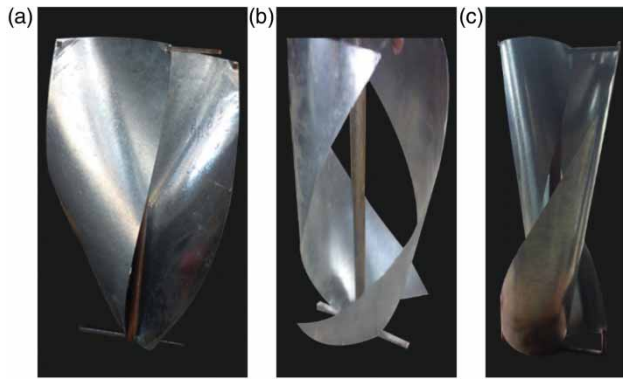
Rotor construction: (a) First roll over the sheets and set on the shaft, (b) Weld of the blades on the shaft, (c) Final roll and rivet.
